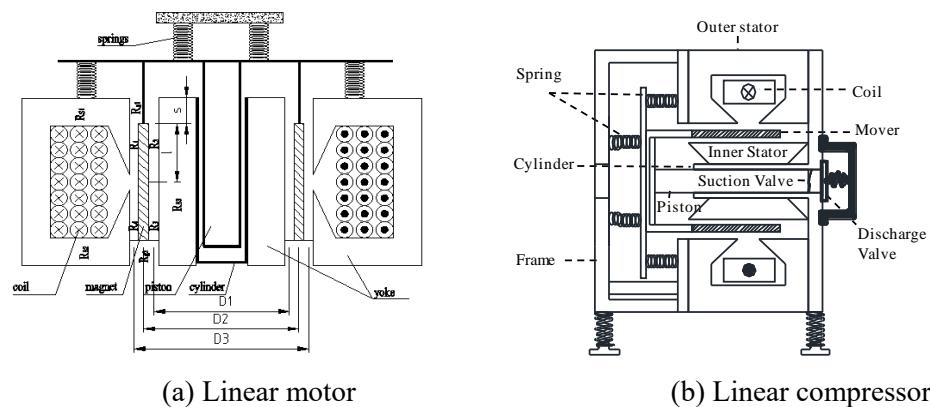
Schematic diagram of Sunpower type linear motor and compressor
